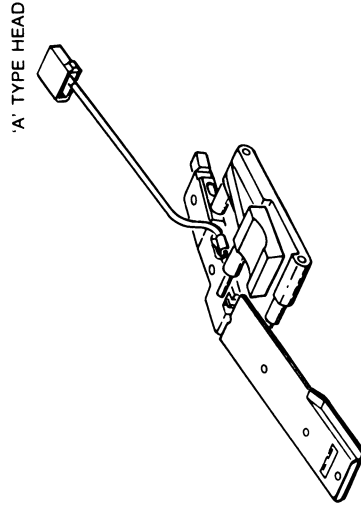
HEAD INSTALLATION TOOL IN 'A' TYPE HEAD
